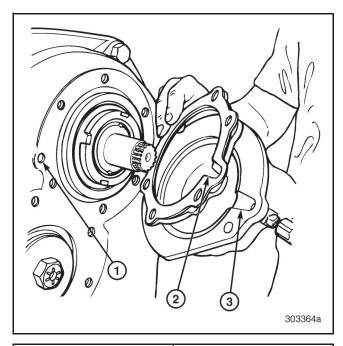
Removing Mainshaft Rear Bearing Cover Capscrews
